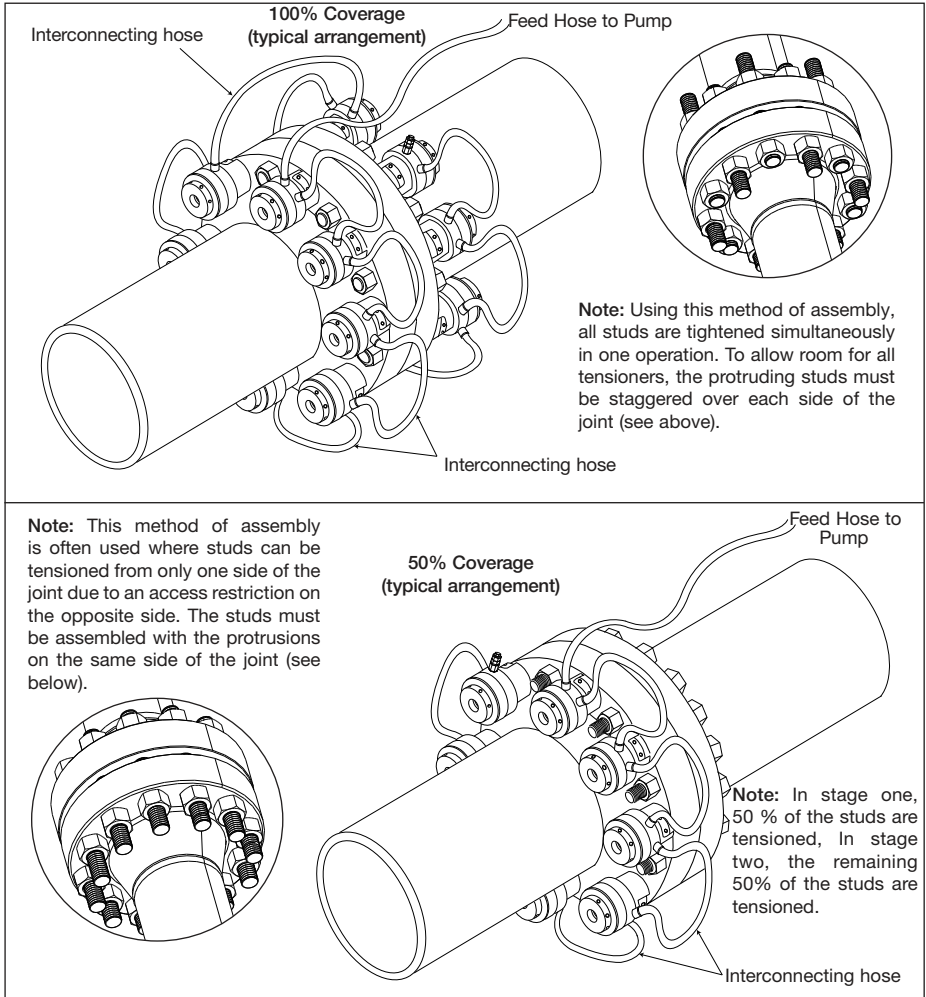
, HYDRAULIC TENSIONER MOUNTING ARRANGEMENTS (TYPICAL)
